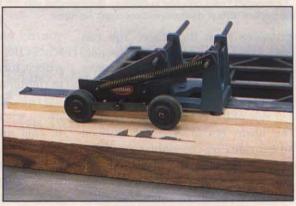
Photo E: Ripstrate includes both infeed and outfeed wheels in a single assembly. Short distance between wheels provides better support for ripping shorter lengths of stock.
